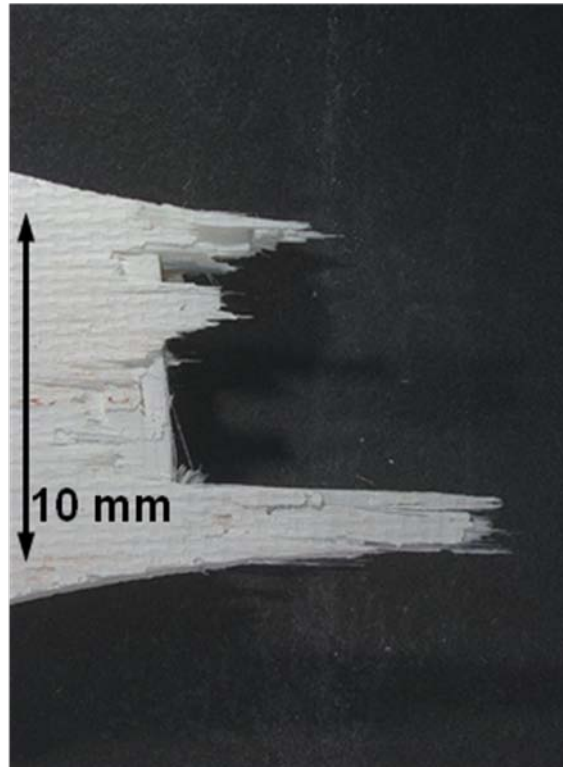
Fracture surface of the N720/AM specimen tested in tension to failure at 1000°C in laboratory air.
